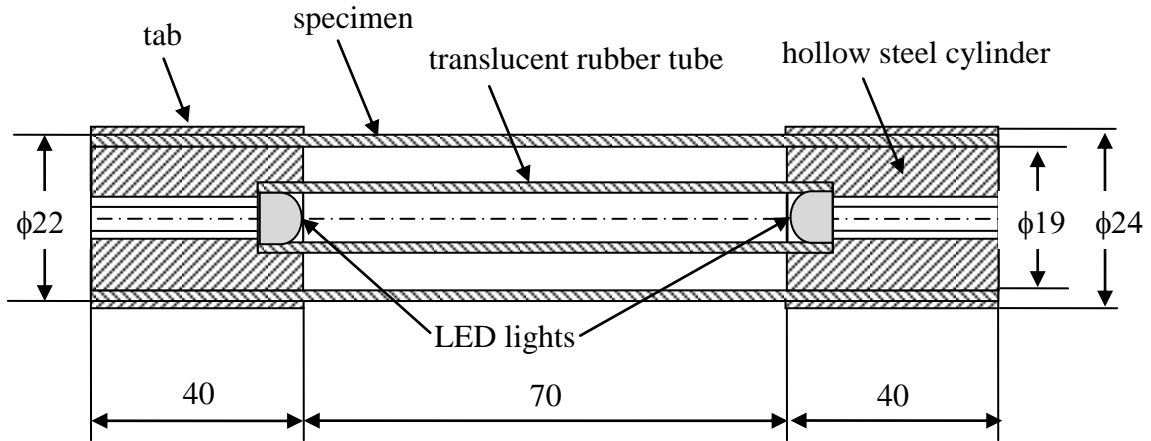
Schematic of lightning system and final geometry for type B tubes (measures in millimeters)
